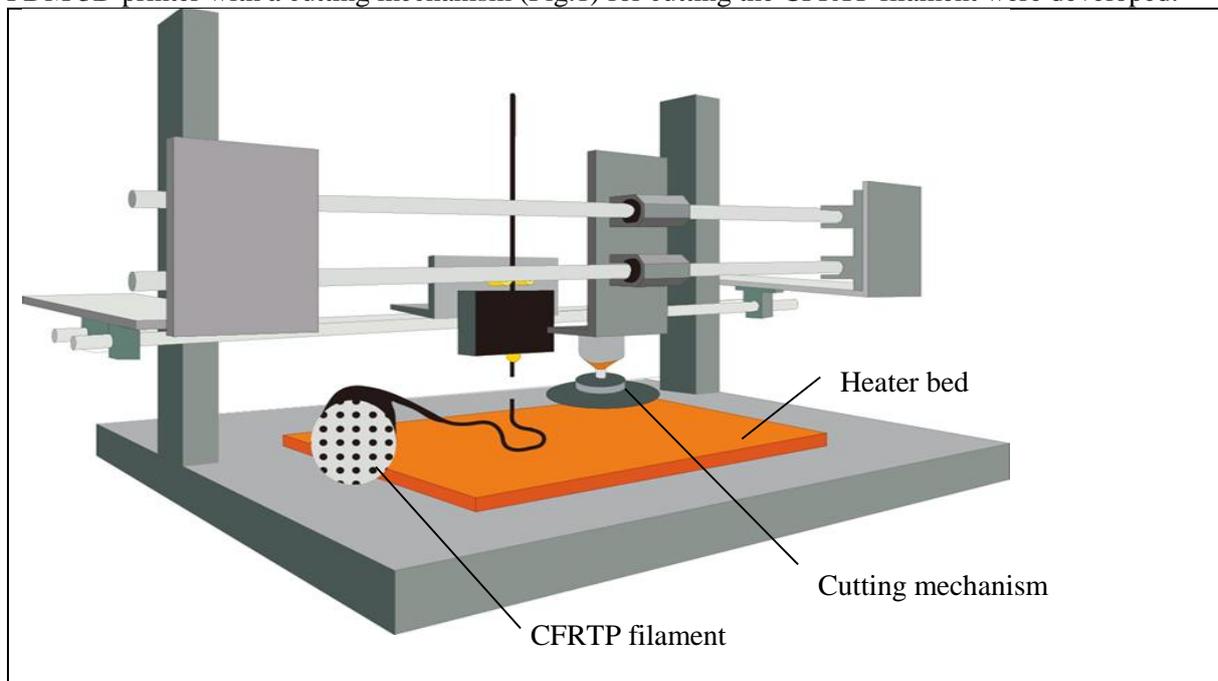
Schematic diagram of the 3Dprinter with continuous carbon fiber and cutting mechanism.
